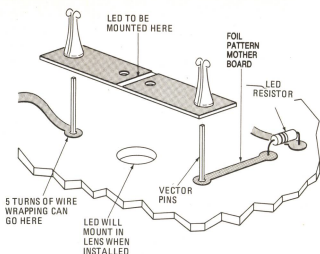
HOW LED MOUNTING STRIP forms a plug-in connector when mated to suitable pins inserted into the PC board.
